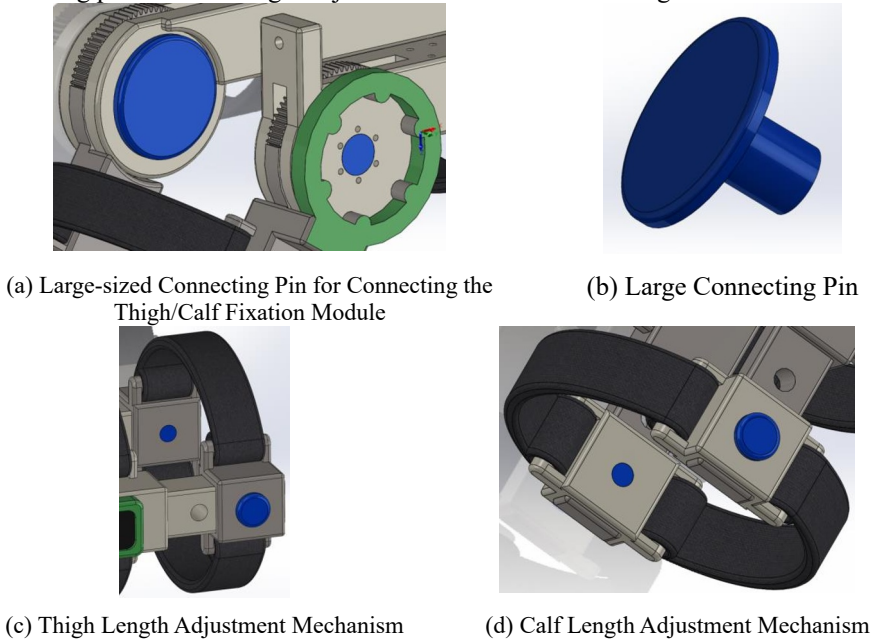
The large-sized connecting pin connects the thigh/leg fixation module, while the small-sized connecting pin fixes the length adjustment mechanism of the thigh/calf (Photo credit: Original)
